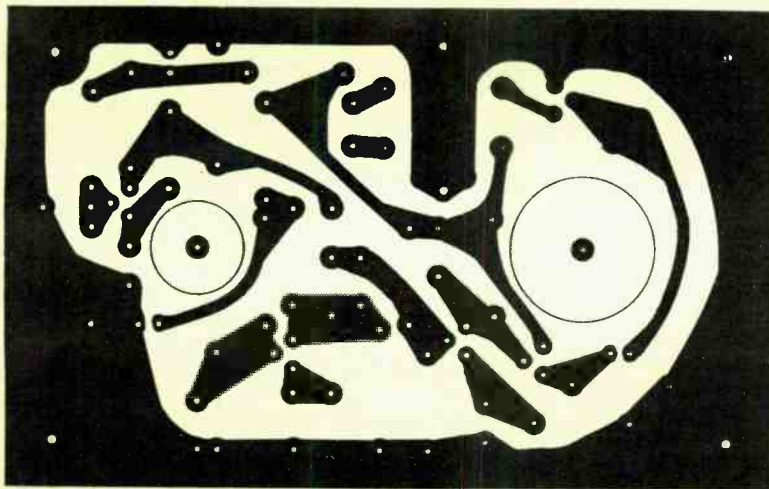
Part of the speaker and coil L1 pass through the circuit board and must be carefully positioned to fit properly. The speaker is not bolted and can be shifted.
